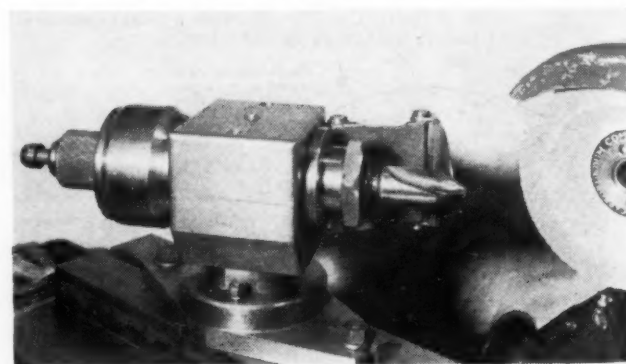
FIXTURE FOR OBTAINING A SATISFACTORY GRIND ON SHIP COUNTERSINKS
